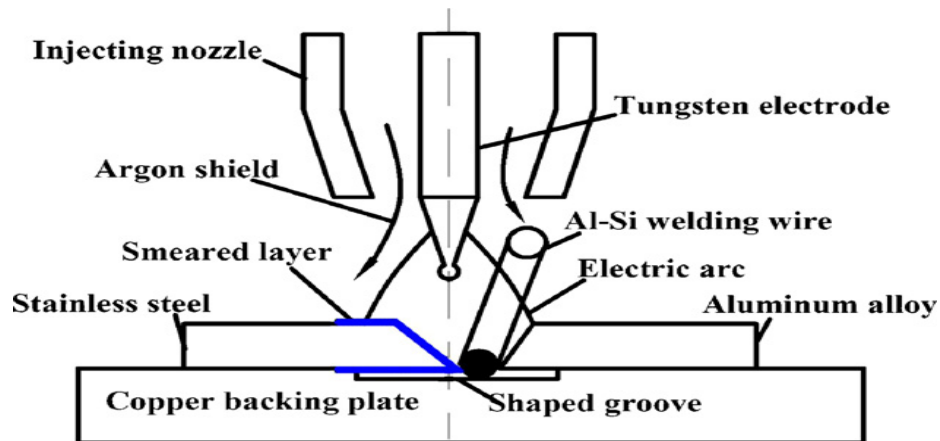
Schematic of TIG brazed Welding of Al Steel [13]
